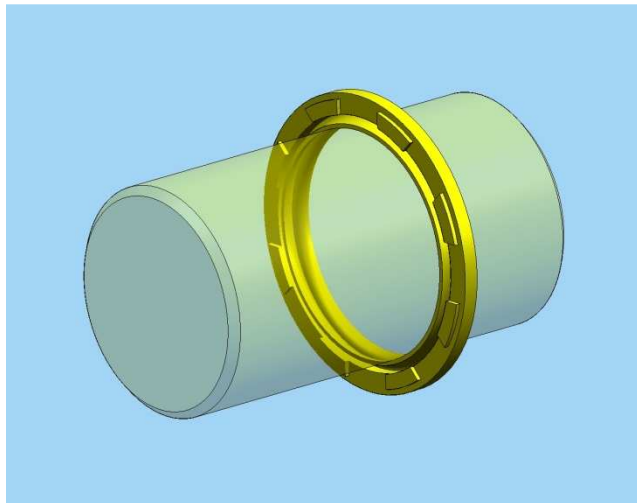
shaft seal for the crankshaft in a Formula 1 engine
